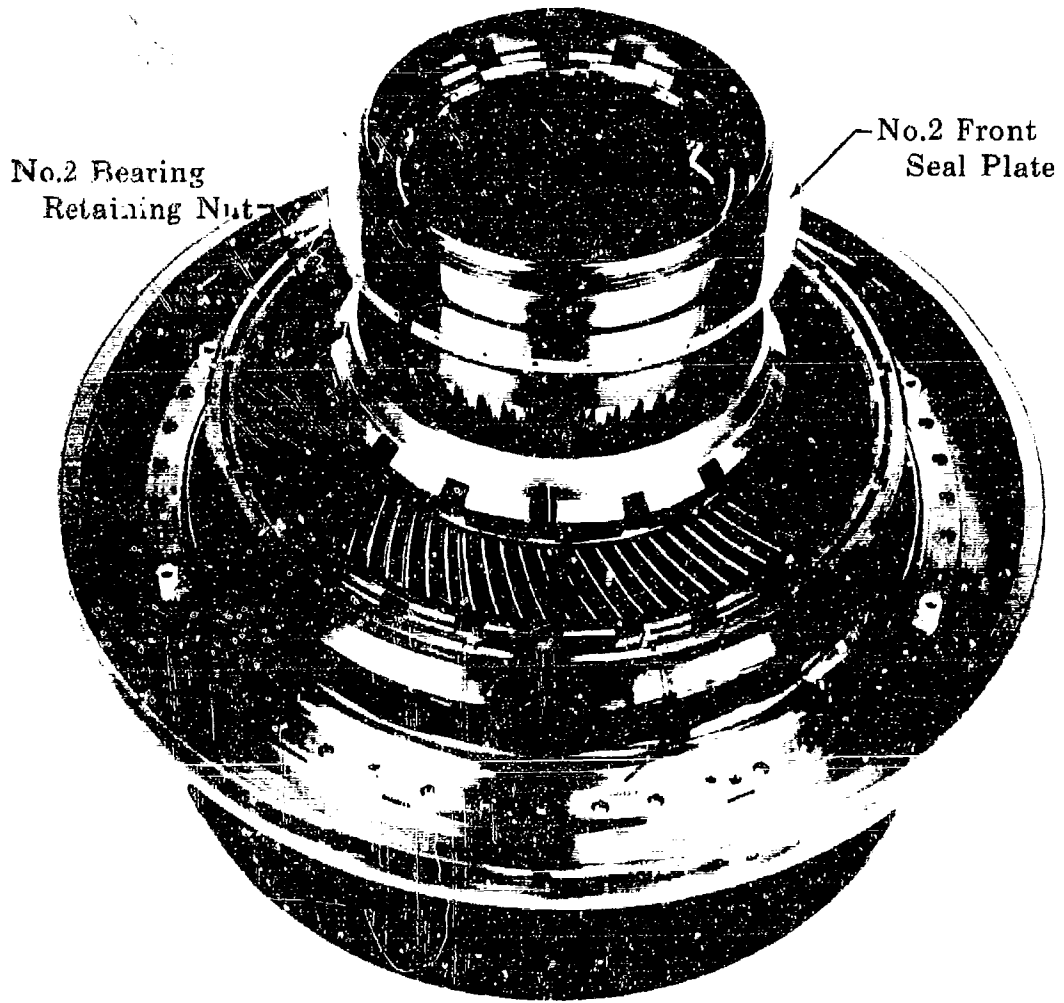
No. 2 Hub, Seal, Bearing and Shaft Assembly
